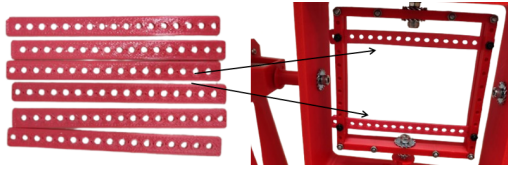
Universal mounting fixture made out of TPU (left) attached to the inner frame (right).
